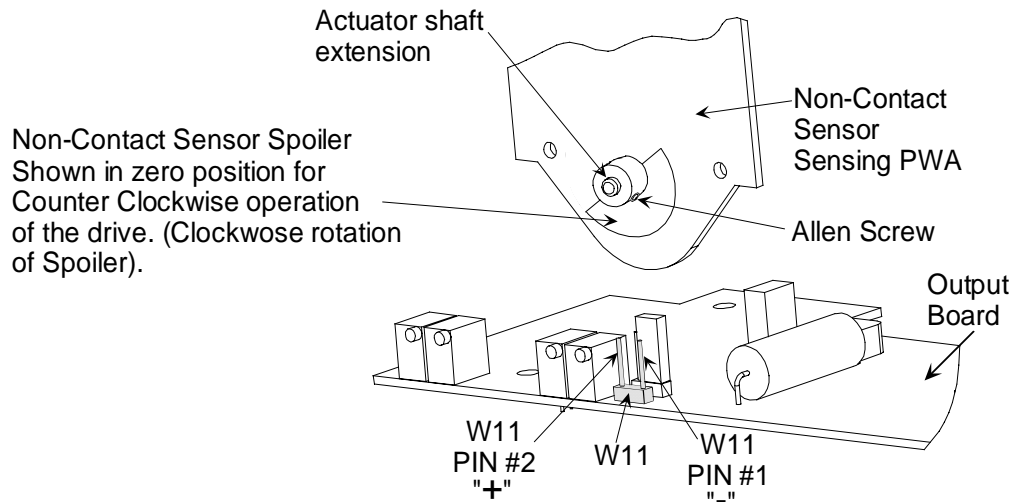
Location of NCS Sensor Assembly and Output Board
